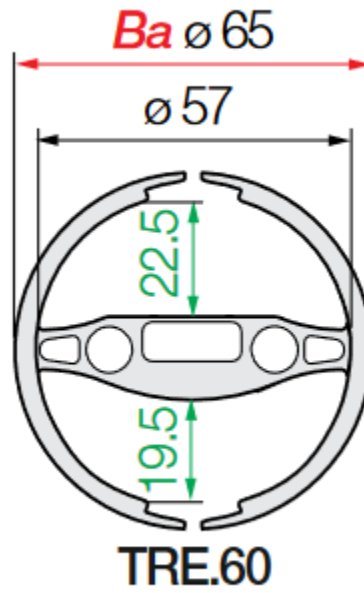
XPP Robot "Cable Carrier" dimensions (mm).
